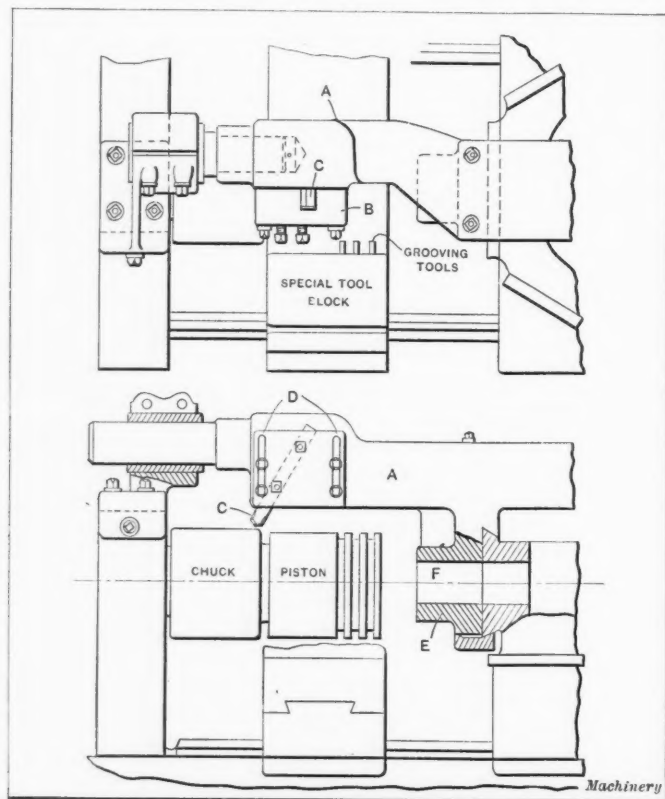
Piston Turning Tool having Adjustable Tool-block
